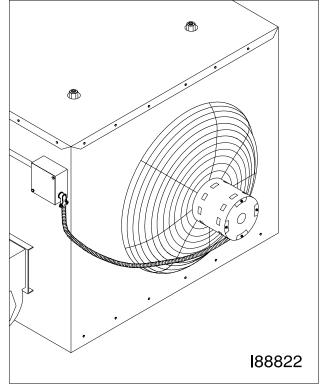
C - Fan Installed on Furnace Cabinet
